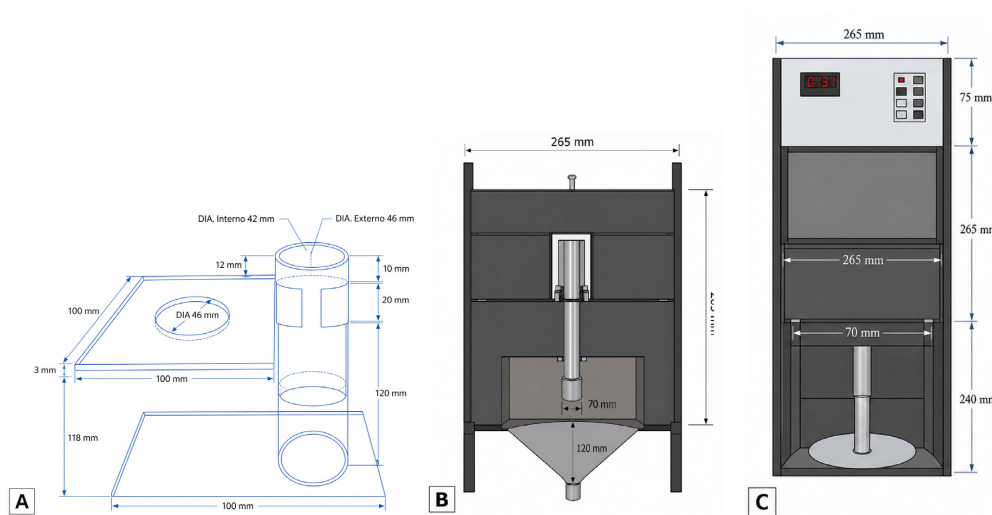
A, B and C. Dimensions of the metal/mold interface and the ingot mold and Basic structure of the device, side views and dimensions.
